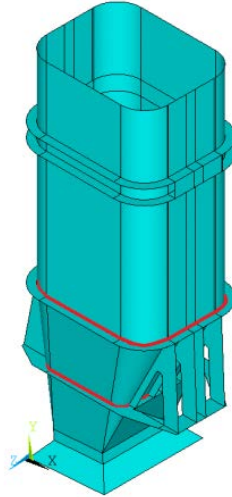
Fatigue life assessment of two welded details (line in red), containing an initial crack, at sections of exhaust system A
